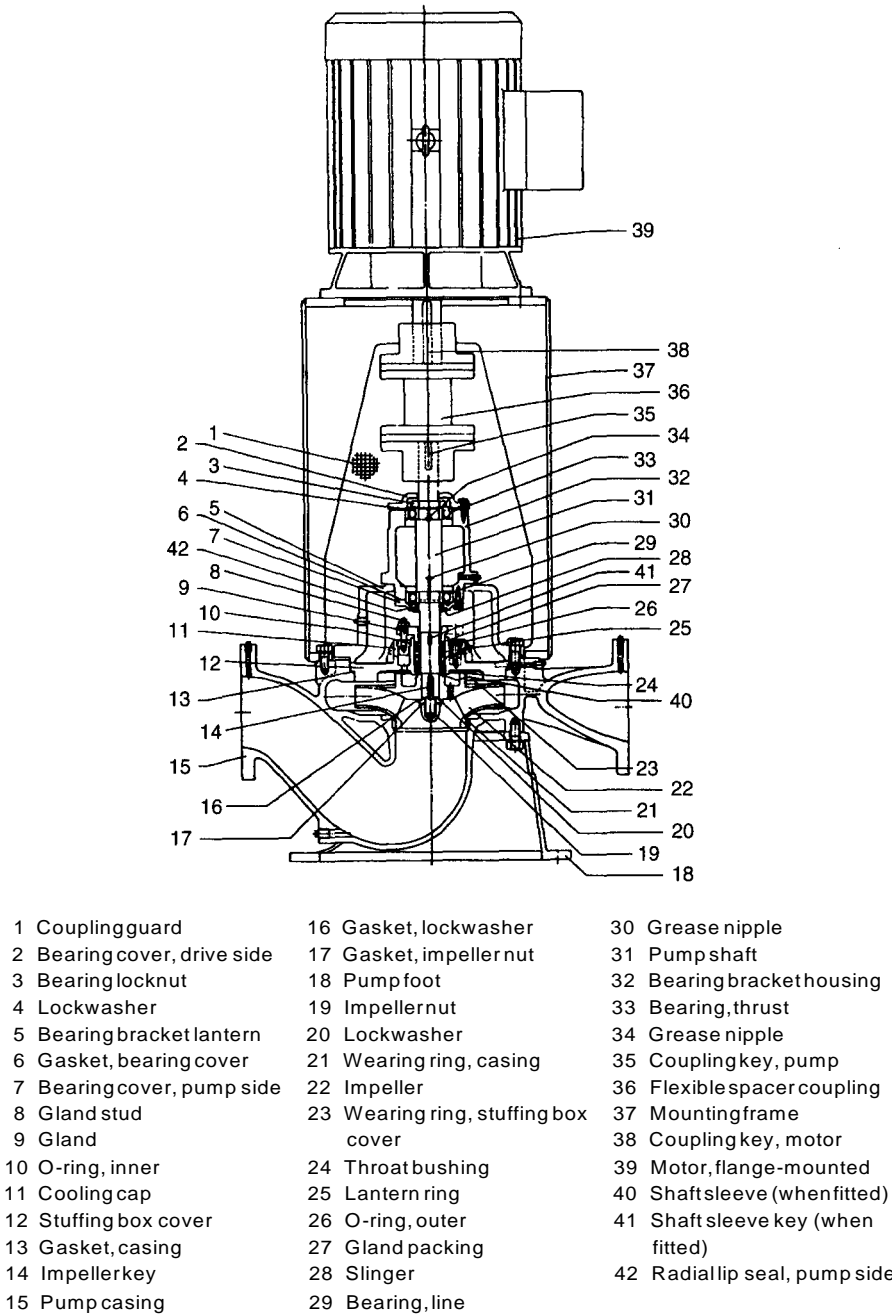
Vertical radially split casing (back-pull-out) centrifugal pump. Courtesy Ingersoll-Dresser Pump Company.
